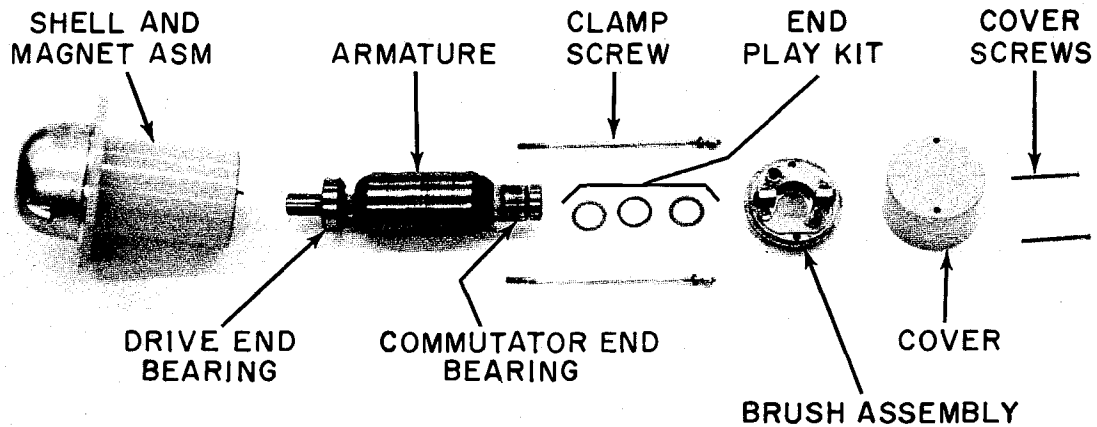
B. 3 3/8 Inch Diameter Mower Motor
